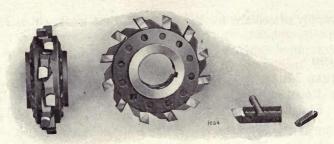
Adjustable Inserted Tooth Slotting Cutter
